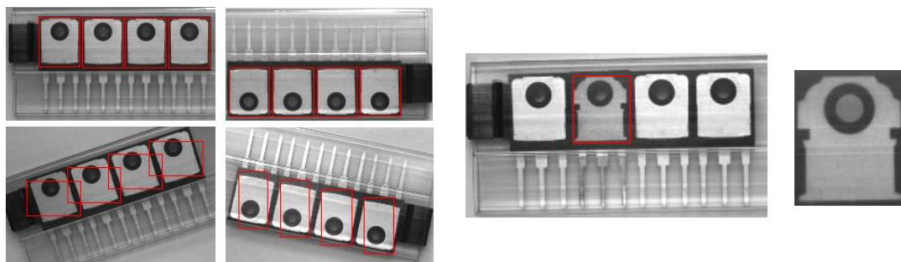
Inspection task: Rotation invariant matching (left), power transistor package checking and template (right)
